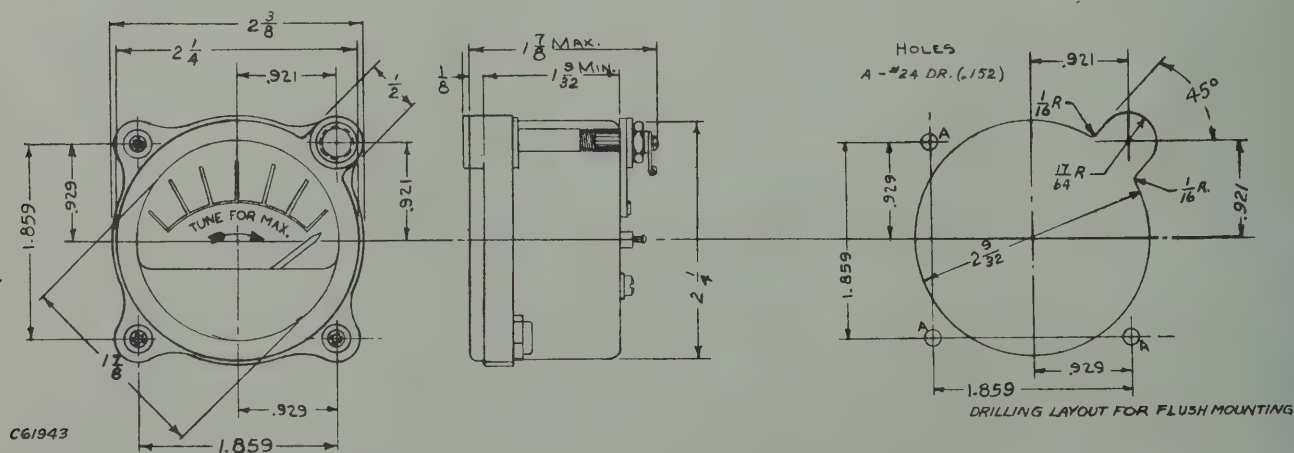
TYPE MR-57A TUNING METER, OUTLINE AND MOUNTING DIMENSIONS
